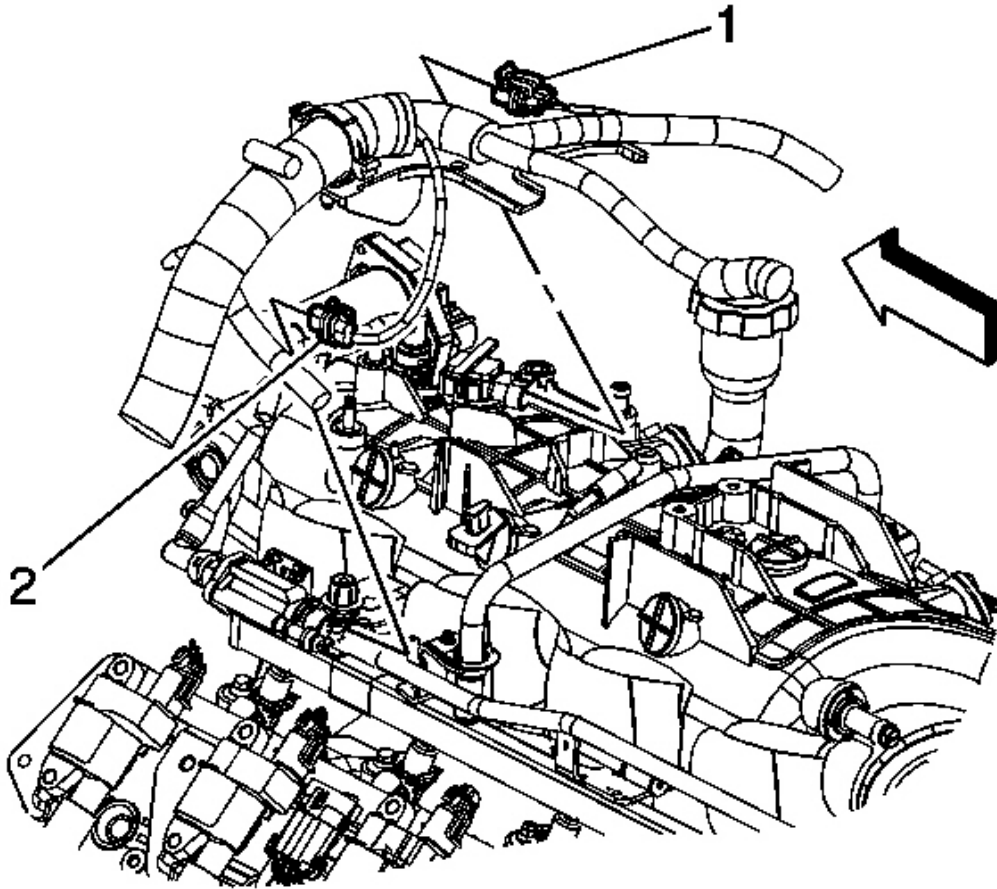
View Of Engine Wiring Harness MAP Sensor Electrical Connector
